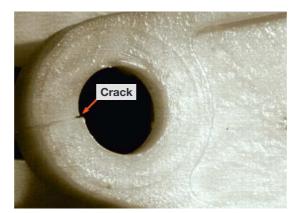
, POM clamp (M = 18, AL). Through the gate area (left eye), a crack develops in the weld line, and the molded part surface shows a very cold impression of the mold surface (see also \rightarrow weld line and \rightarrow orange skin).
